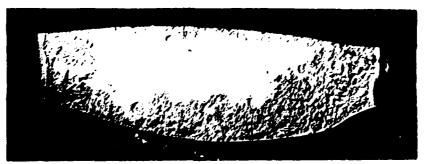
Weld made with no preweld heat treatment, DCEN, ER5356
